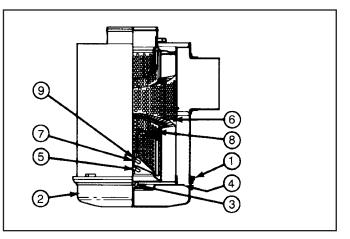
Dual - Heavy Duty Dry - Type Element
